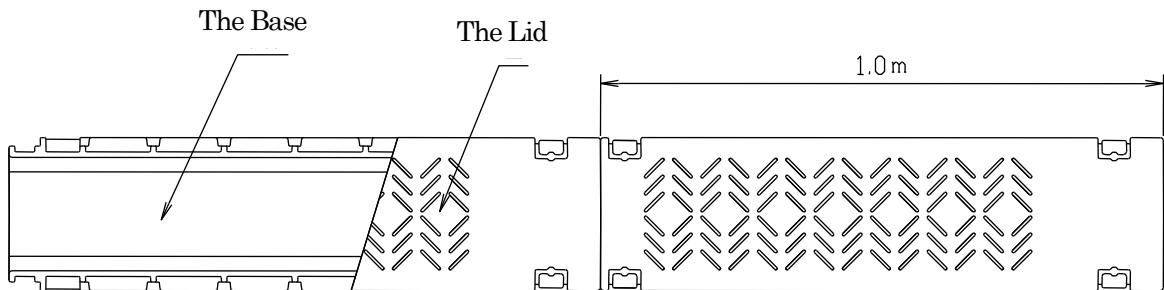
Structure (Assembly drawing of 090, 150, 200, 201, 300)
